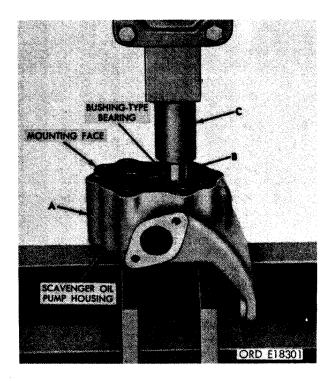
REPLACING SCAVENGER OIL PUMP HOUSING BUSHING-TYPE BEARING.
